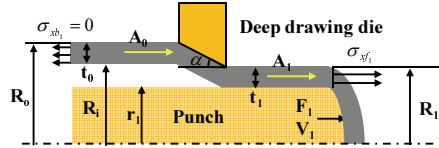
Schematic drawing for obtaining forming energy of deep drawing process
